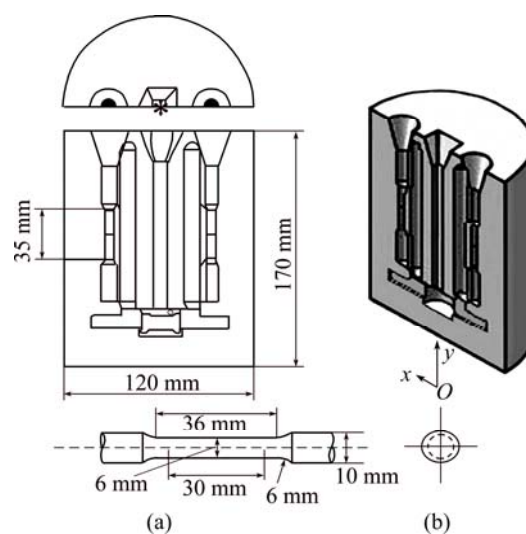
Cast iron mould used for casting (a) and ASTM B557–10 sub-size specimens used for tensile tests (b)
